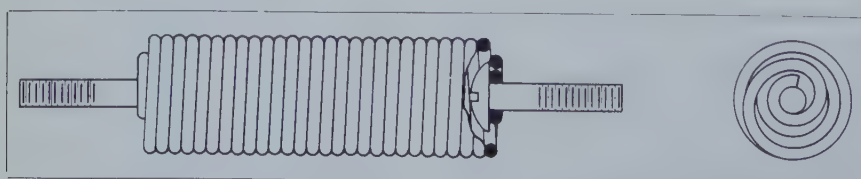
Special Ends must be drawn and fully dimensioned.
